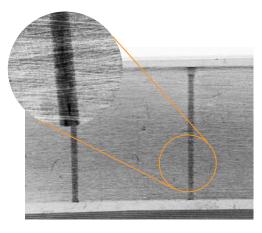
A heavy impact load on this tapered bearing cup race caused brinell and impact damage. These same indentations are evident on the cone race. This is true metal deformation and not wear as with false brinelling. The close-up view of one of the grooves shows the grinding marks still in the groove.
